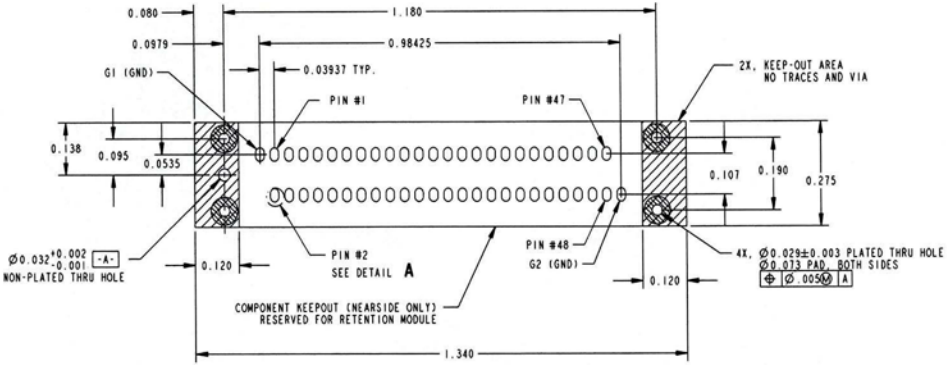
N5345A soft touch probe footprint dimensions, pin numbering, and specification
